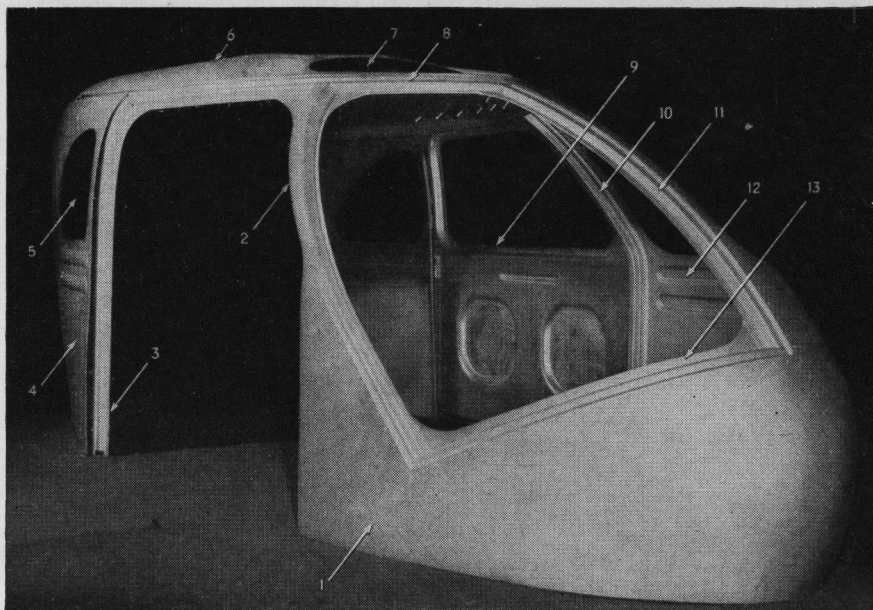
Cabin superstructure frame setup: (1) right bow panel; (2) double front-door post; (3) rear right-door post; (4) rear side panel; (5) side window; (6) monopiece roof; (7) crown window; (8) crown bow frame; (9) left side door; (10) single front-door post; (11) center bow frame; (12) left bow panel; (13) lower bow door post. Fabrication simplicity is typified in the cabin fixed superstructures where the side panel is blanked from a single piece and formed with stiffening beads and contour in one operation. The cabin rear primary structure attaches to rear side skins of the superstructure and encloses the baggage compartment decked by the fire wall.
